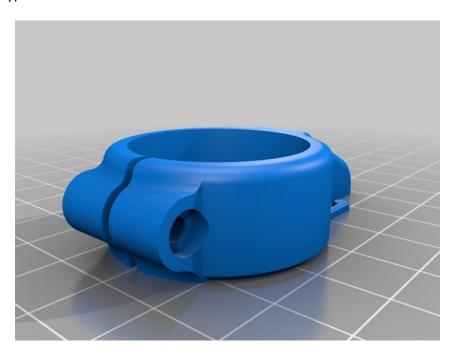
Gimbal Motor Frame 1 (Courtesy: www.thingiverse.com/thing:1247236)
